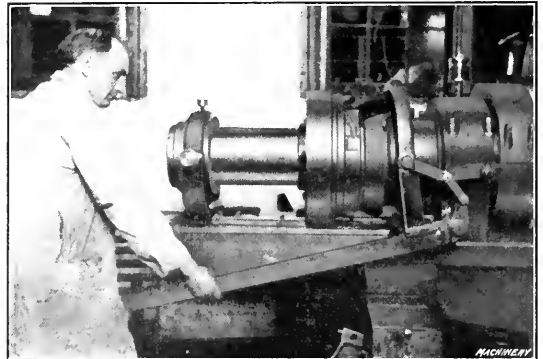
Operator closing the Chuck by Hand when setting up—Chucking Pressure 1500 Pounds
